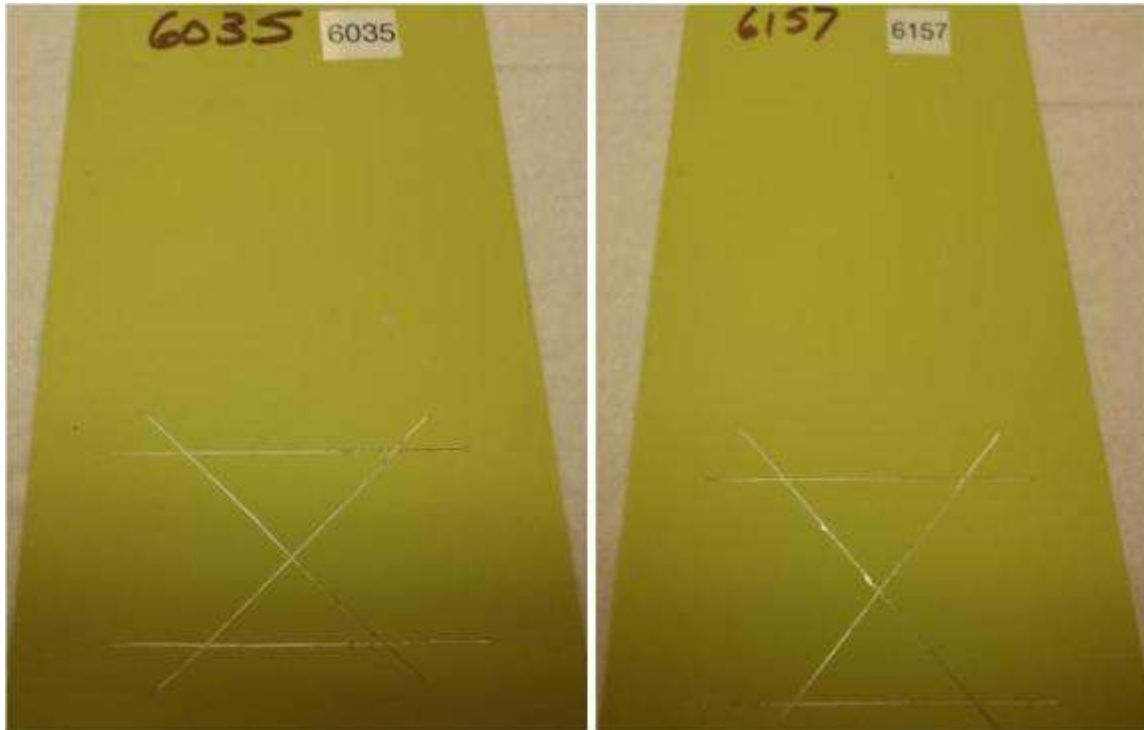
SurTec 650; 6061-T6 (Left), 5052-H32 (Right)
